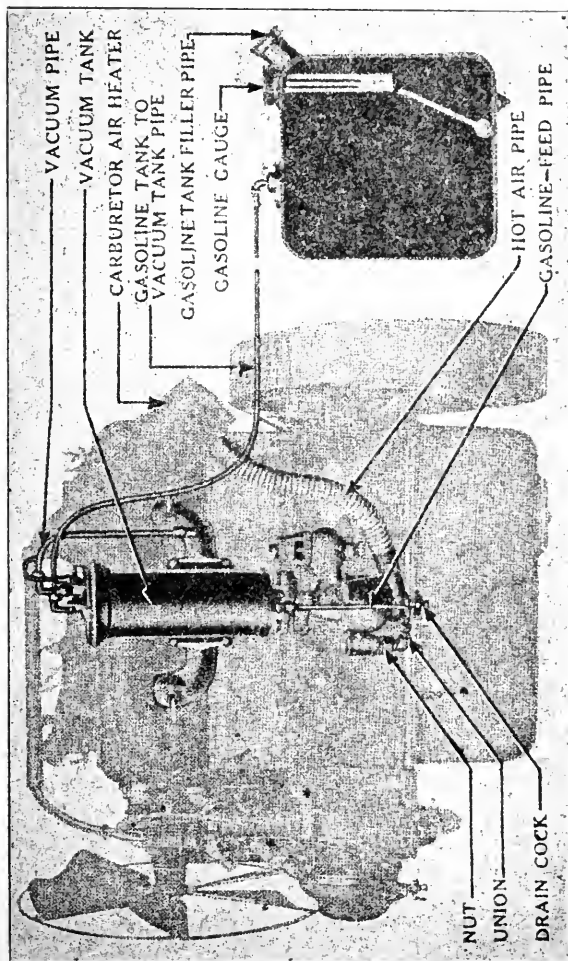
Gasoline System showing Vacuum Tank on Motor and Gasoline Tank located at rear of car.
